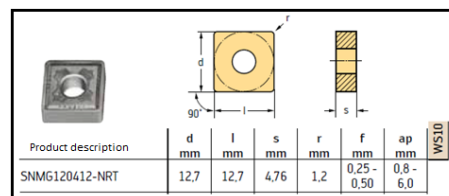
Cutting tool geometry and technical information of uncoated carbide insert
